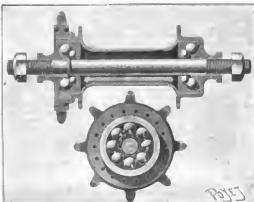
BICYCLE HUB WITH BALL BEARINGS.
